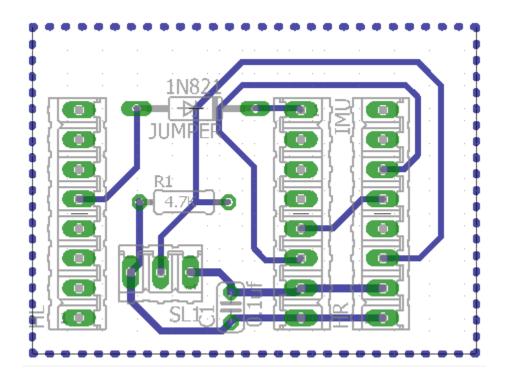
PCB layout for ESP 8266 WAT device (EAGLE CAD)
